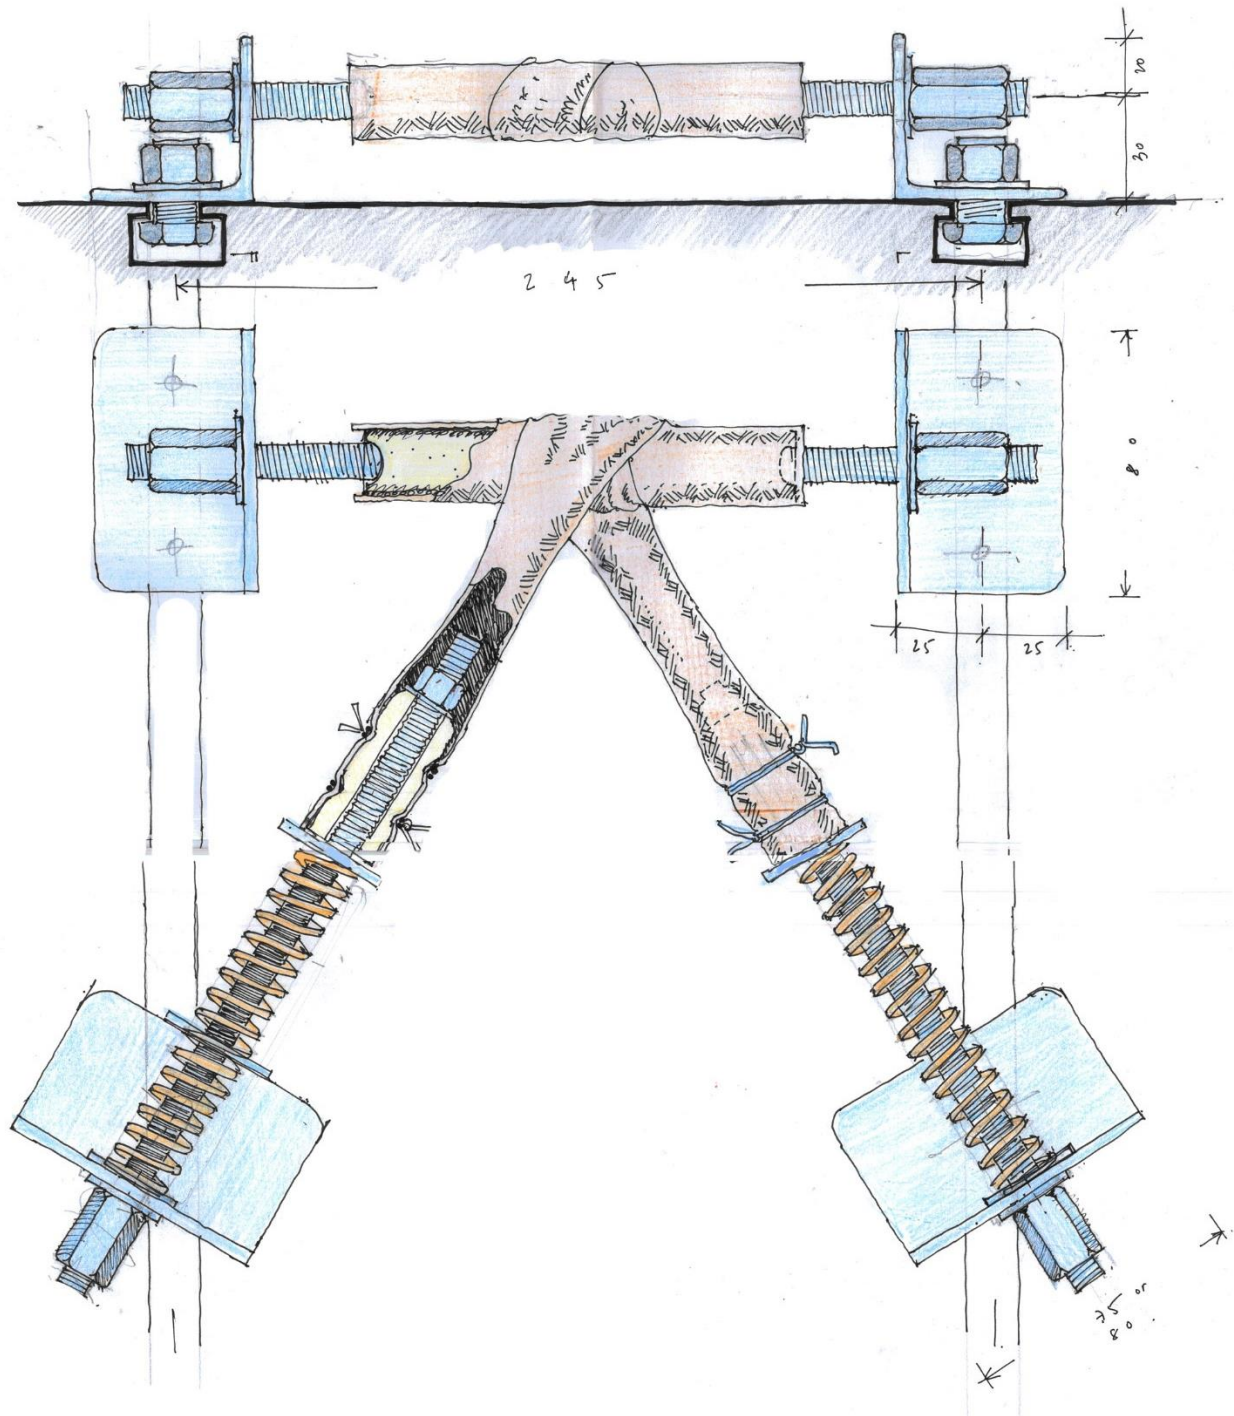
Shop Drawing of the joint fabrication setup, showing the nut and bolt system to apply the tension and the springs to measure the force
